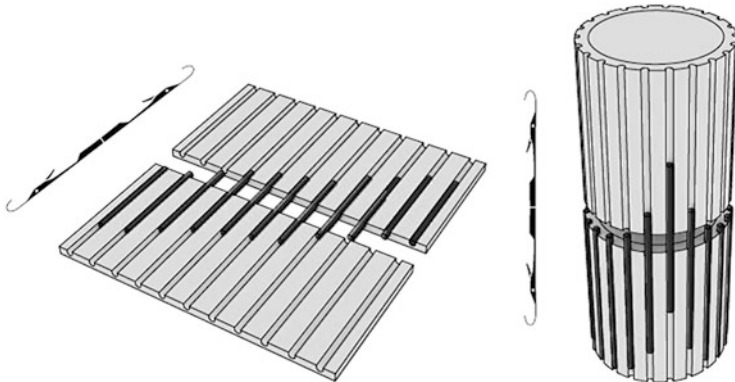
Arrangement of the needle bed on purl flat (*left*) and circular (*right*) knitting machines
